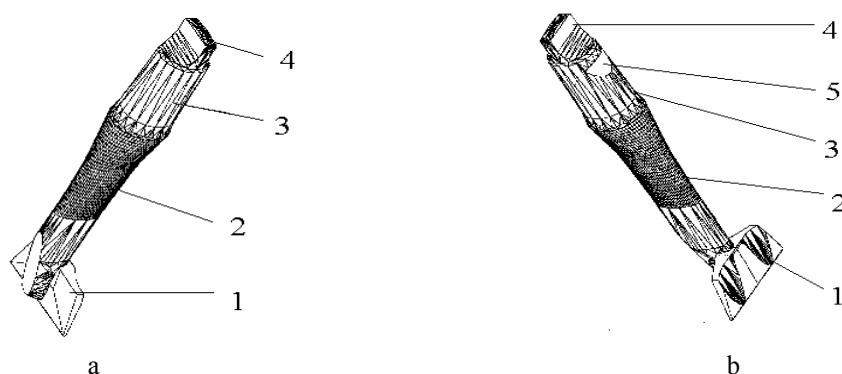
The tamping tool P&T 08-275 UM, for the mechanized tamping:
